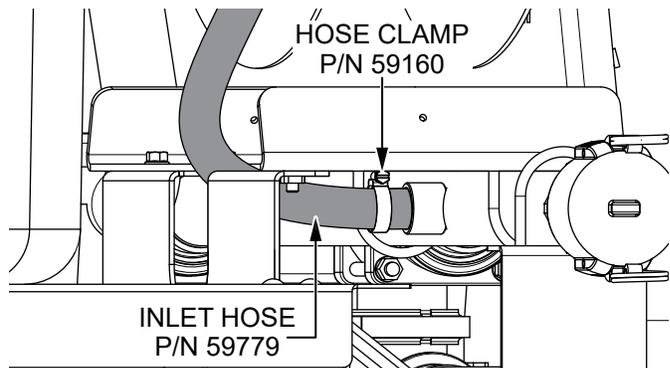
Place Hose Clamp Onto Inlet Hose
